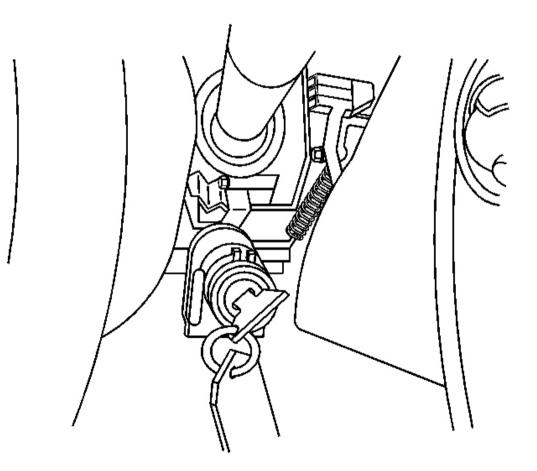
Key & Ignition Lock Cylinder Courtesy of GENERAL MOTORS CORP.
